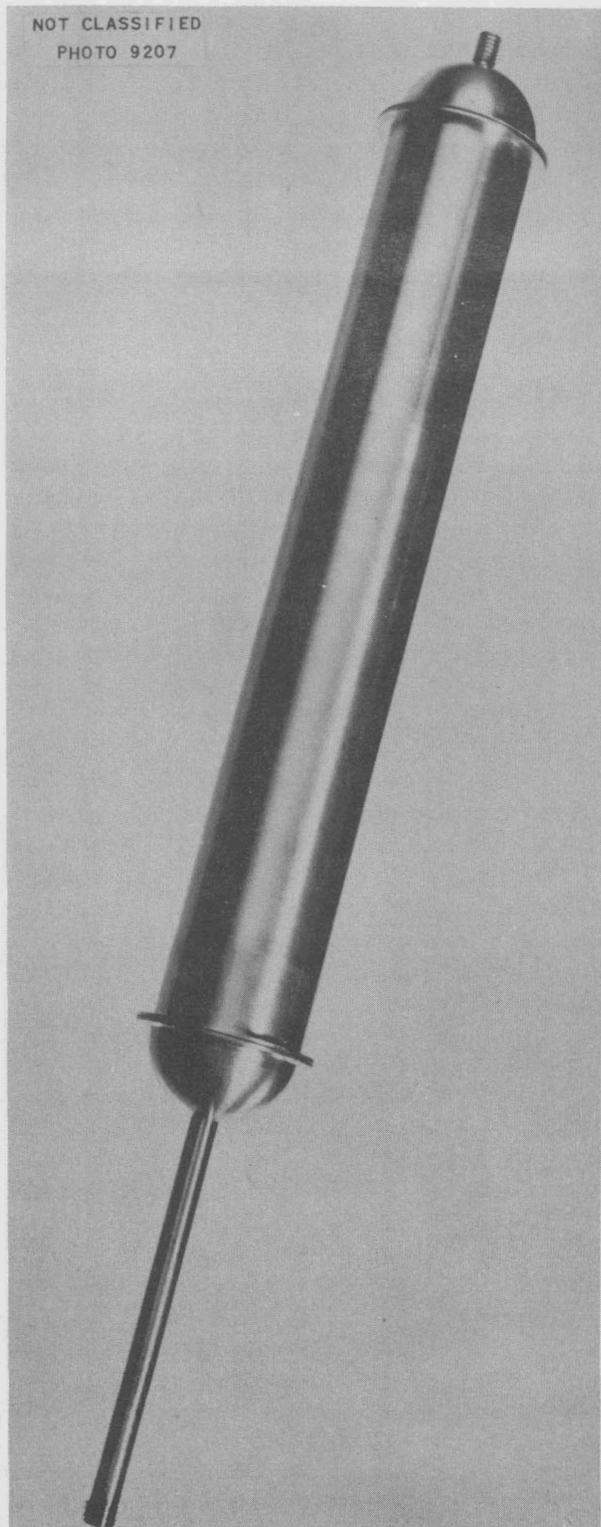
Component Parts of Titanium Plummet Before Welding. Assembled.
